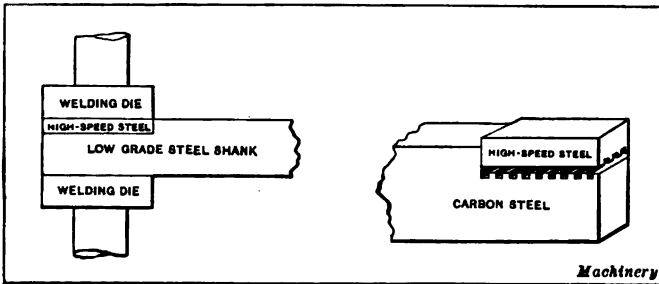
Position of Parts to be welded relative to Welding Dies
